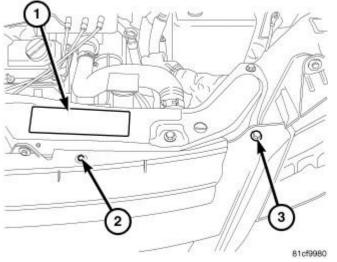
Identifying Grille Pushpin & Fastener Bolts Courtesy of CHRYSLER LLC
